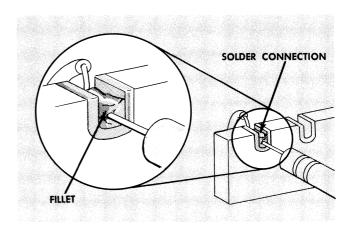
A slight fillet of solder is formed around the wire when heat is applied correctly.
